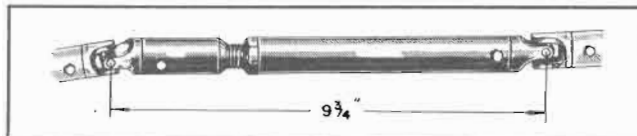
Push-Pull Rod Universal Joint Adjustment
